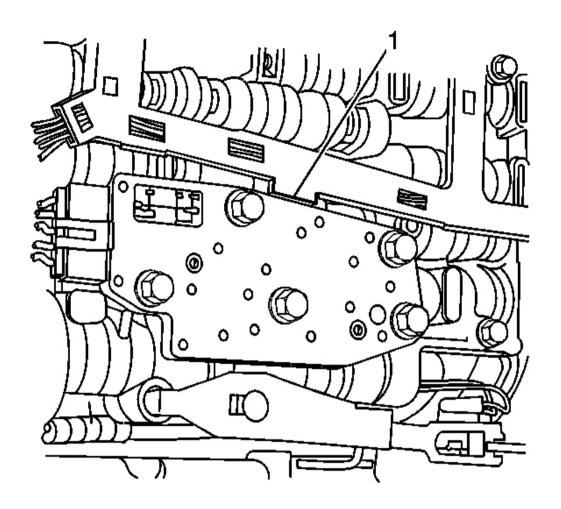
View Of Internal Wiring Harness To The Valve Body Courtesy of GENERAL MOTORS CORP.
